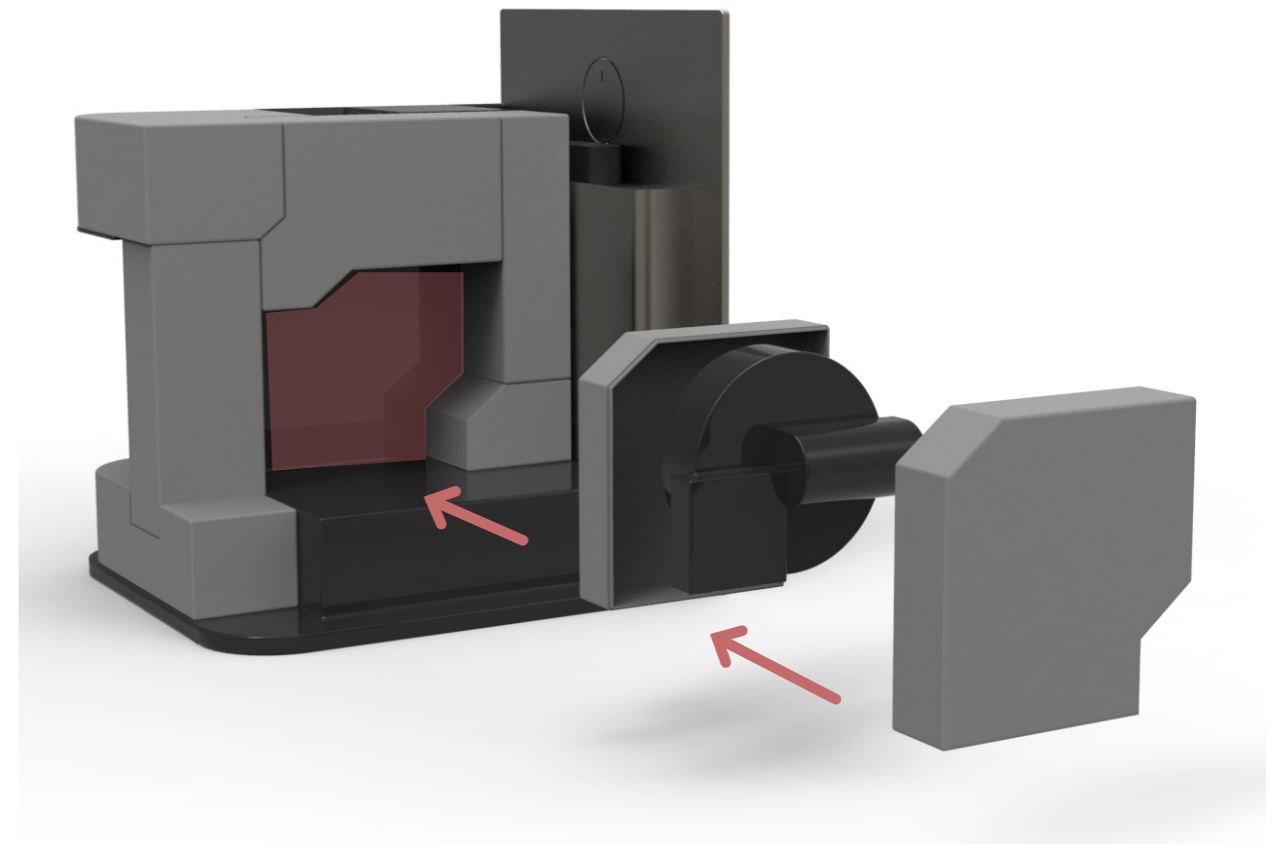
Conceptual representation of a modular interior: Inside the motor module, that fits in the machine
